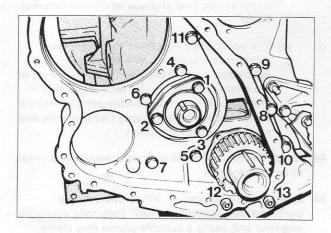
Timing Gear Housing Bolt Tightening Sequence
